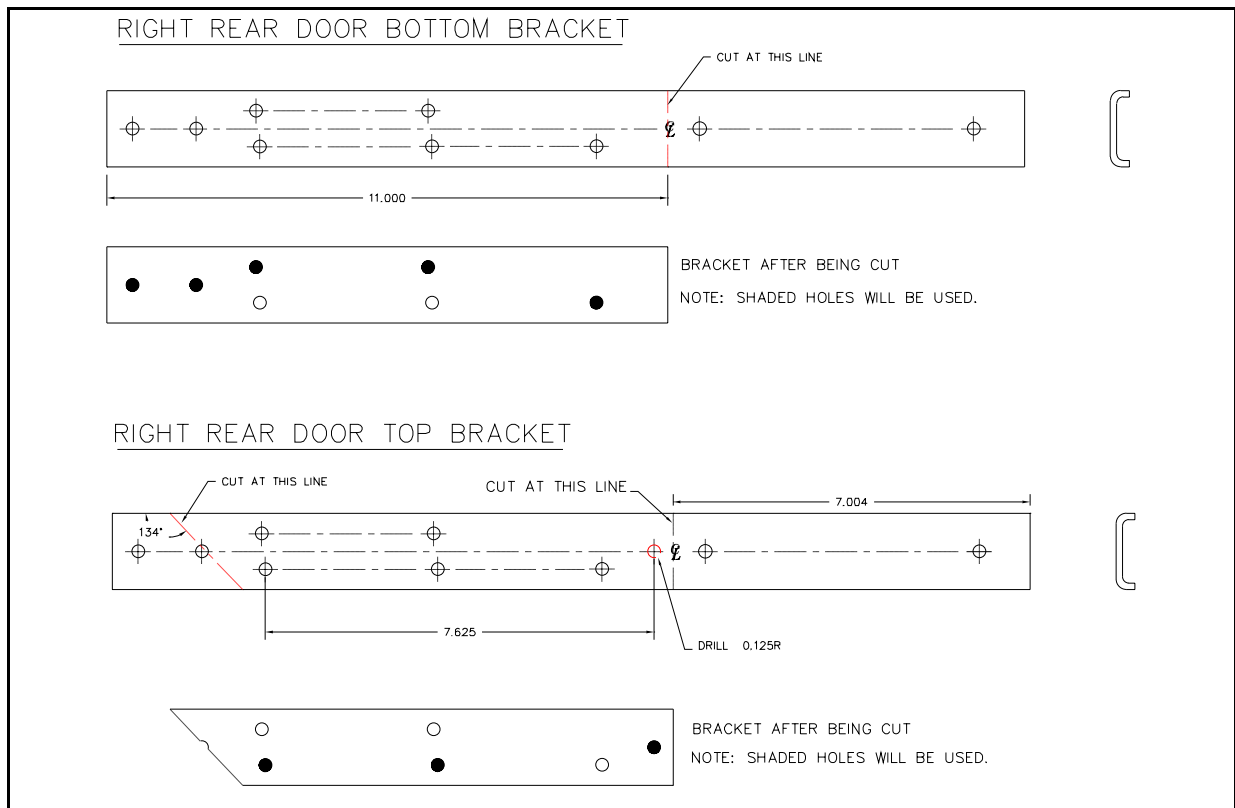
CUT THE BRACKETS PER ABOVE DIMENSIONS AND DRILL AN EXTRA HOLE IN TOP BRACKET
